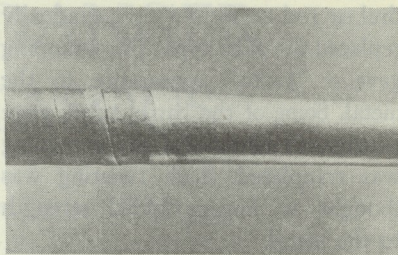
When coiling and welding were completed, above, one finished tube—two for a double-barrel gun—resulted. Note the pattern.
